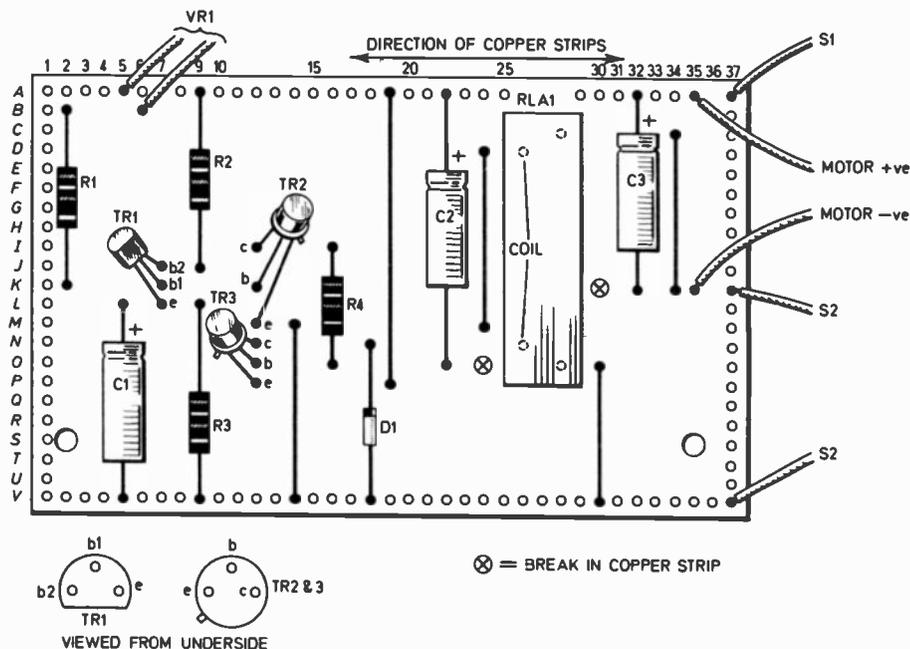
The layout of the components on the veroboard. Note that there are two breaks to be made on the underside of the board at locations K30 and O24.
